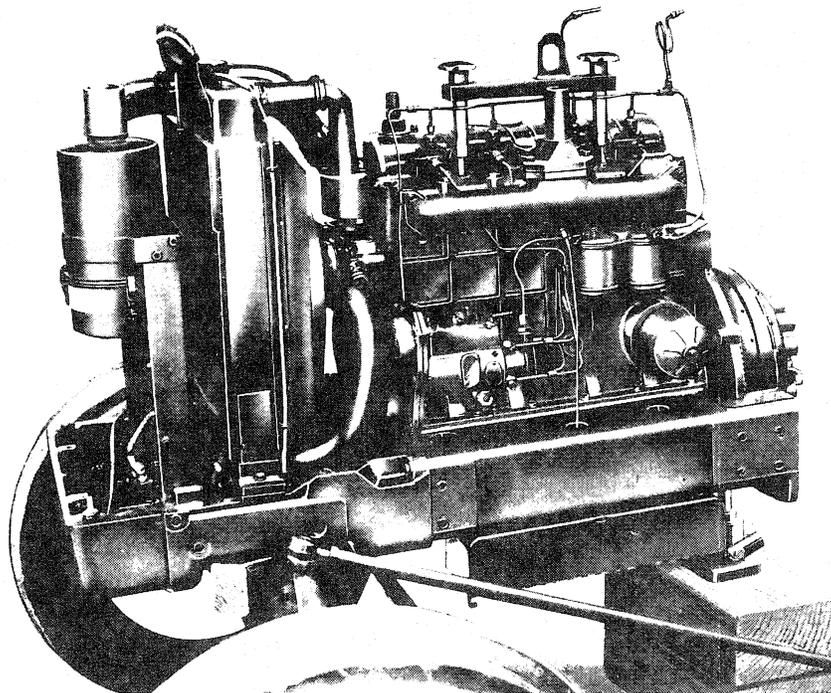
990 TRACTOR 'SPLIT' FOR ENGINE REMOVAL
